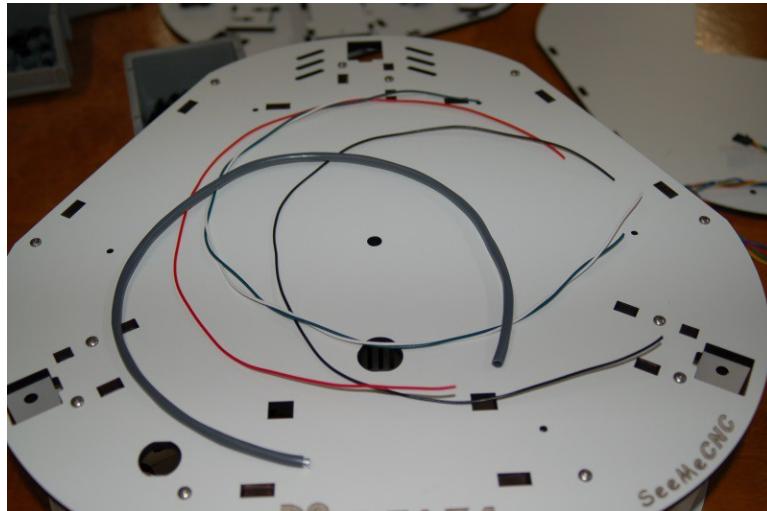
A-9: Wire stripped out of the 4 conductor cable.
